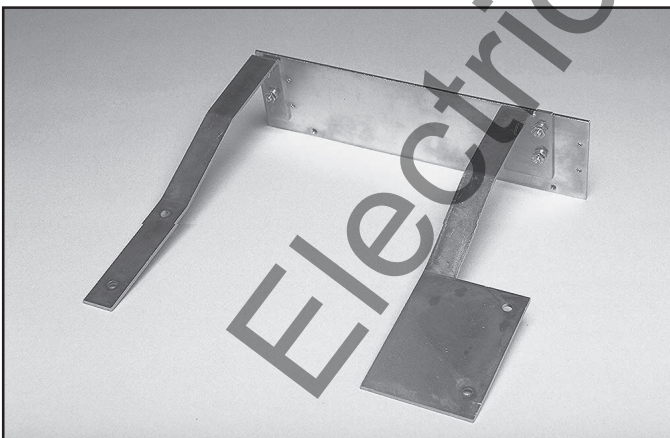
Support Legs Secured to the Trip Unit Mounting Bracket
